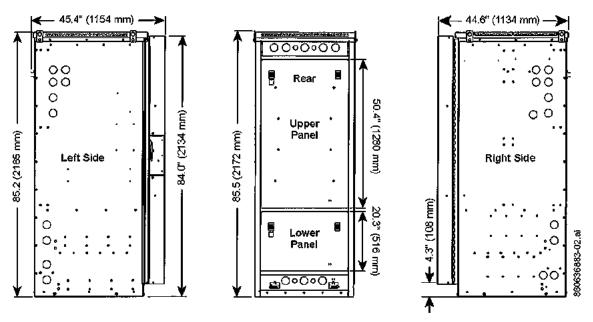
External Left Side, Rear, and Right Side Views, 760237150, 760237697, 760239141
